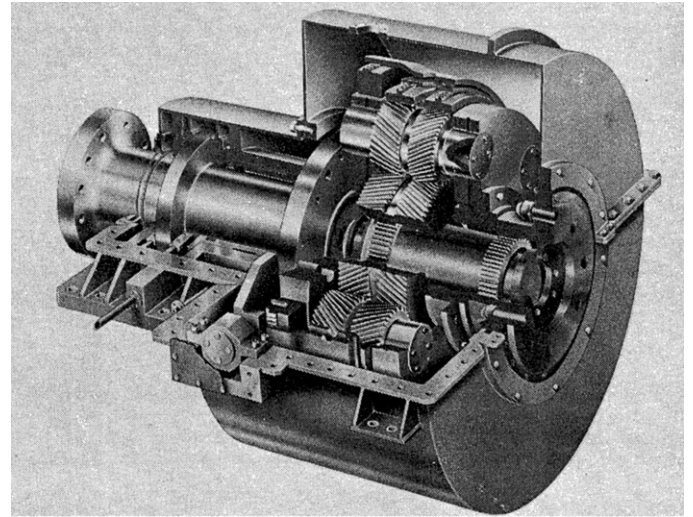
• Diesel propulsion drives up to 27,000 hp (Courtesy of Allen-PCG)
